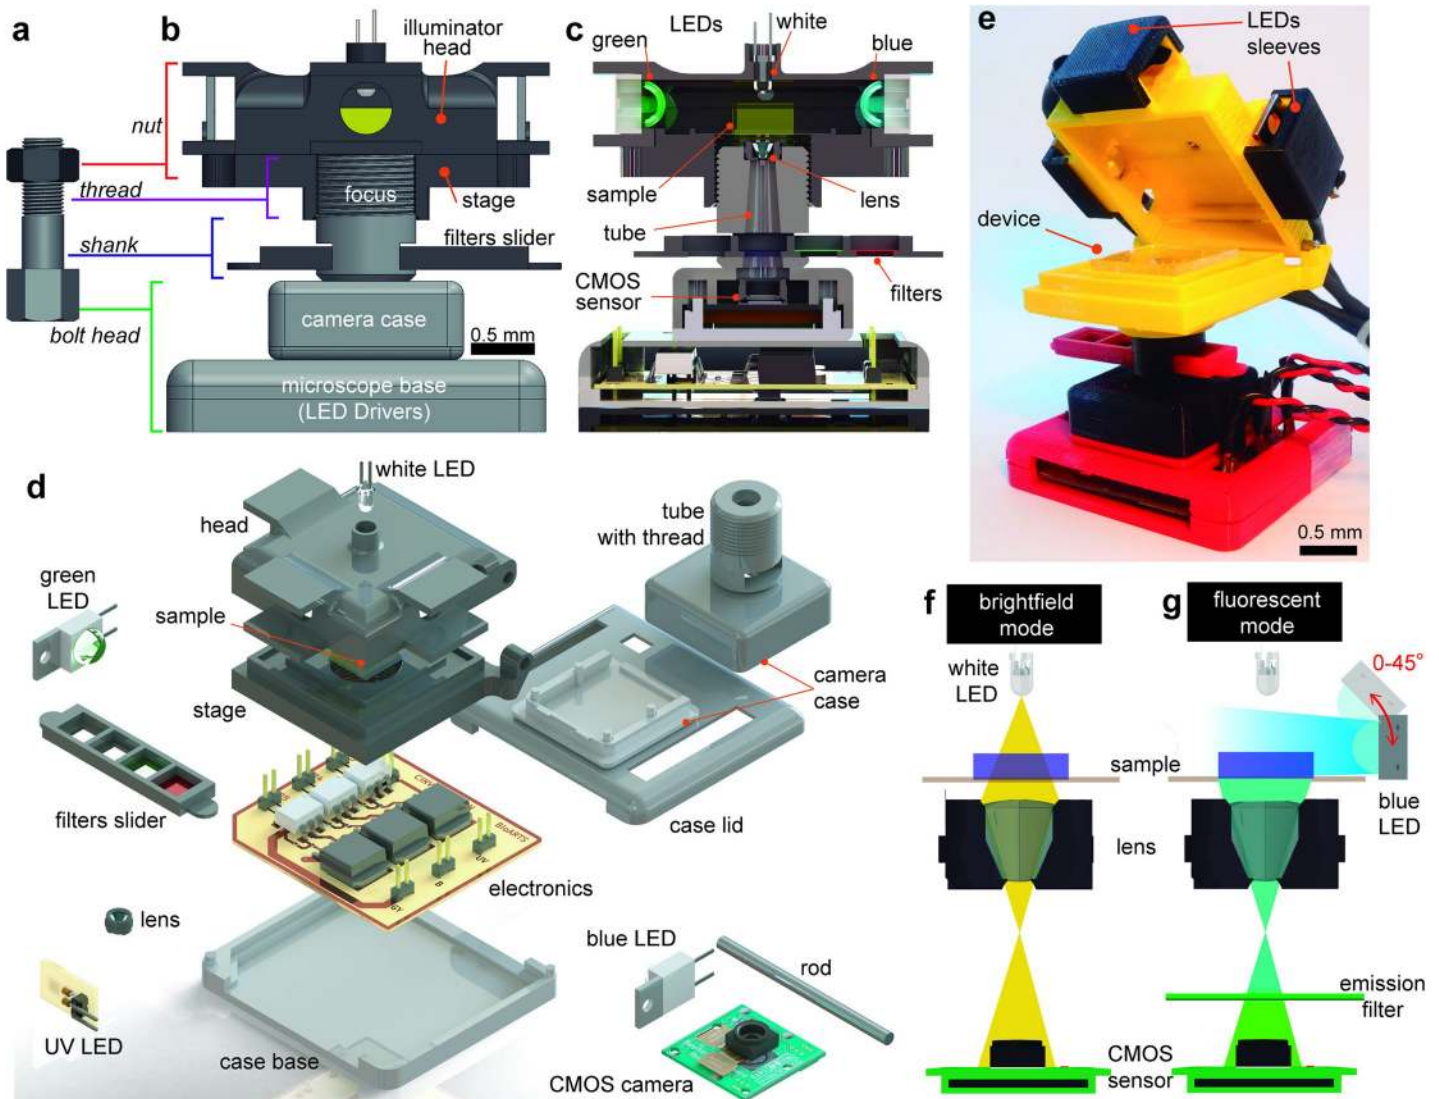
Anatomy of the miniature microscope. (a) The mechanism of the microscope is inspired by how a nut and bolt works. (b) Front view of the microscope. (c) Cutaway diagram of the microscope. (d) Exploded view of the different components comprising the microscope. (e) Photograph of the microscope with the lid open and a microfluidic device mounted on the stage. Schematic of the light path during operation of the microscope in (f) bright-field and (g) fluorescence mode. Color LEDs can be placed at different angles (0–45°) to provide a homogeneous illumination.
